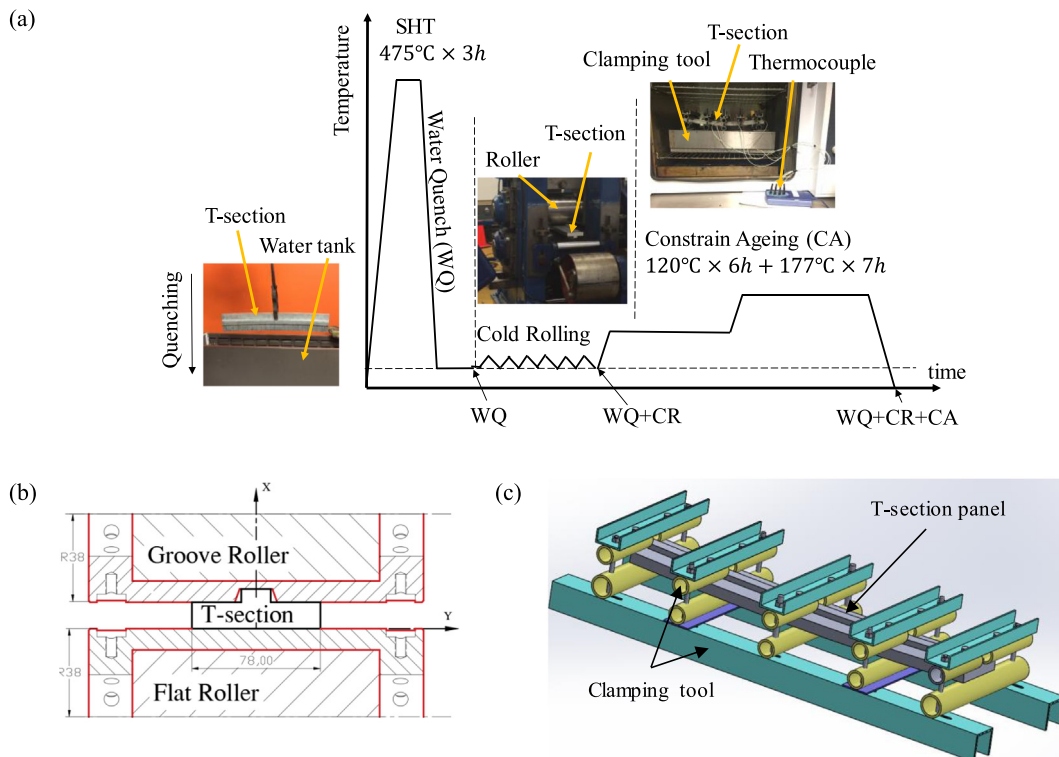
Schematic illustration of the (a) manufacturing process, (b) rollers and (c) constrained ageing clamping tool.
